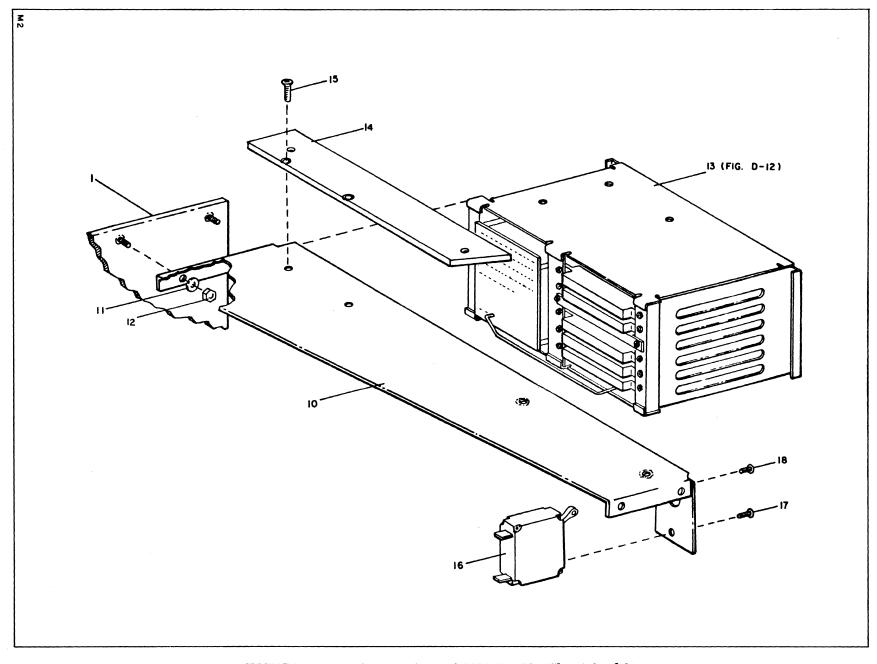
MAIN FRAME ASSEMBLY (Sheet 3 of 3)
